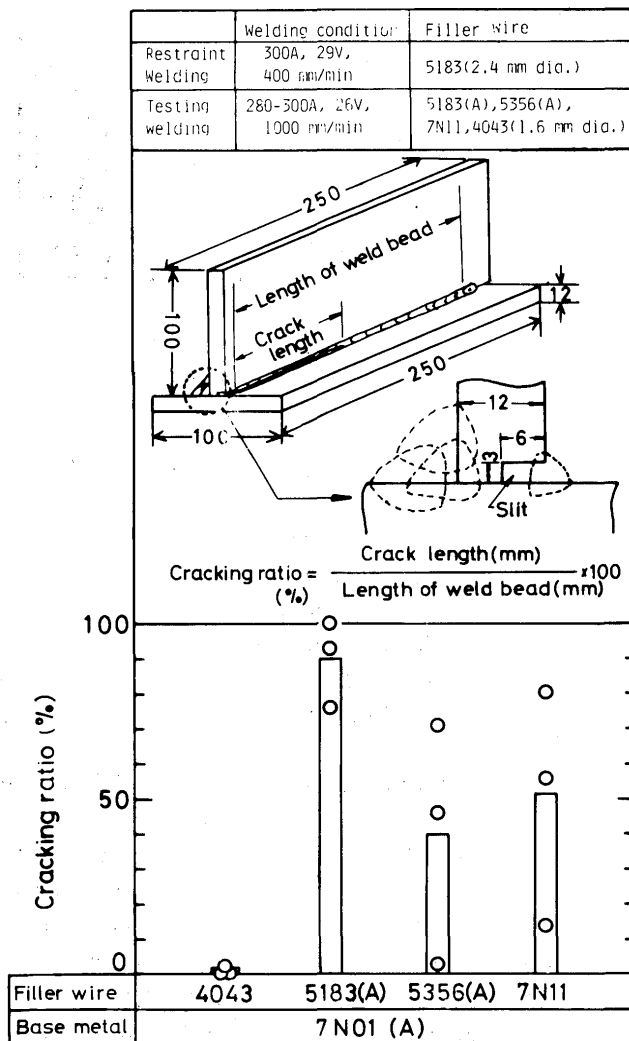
Cracking ratio in weld metals of 7N01(A) against various filler wires in T-joint cracking test
